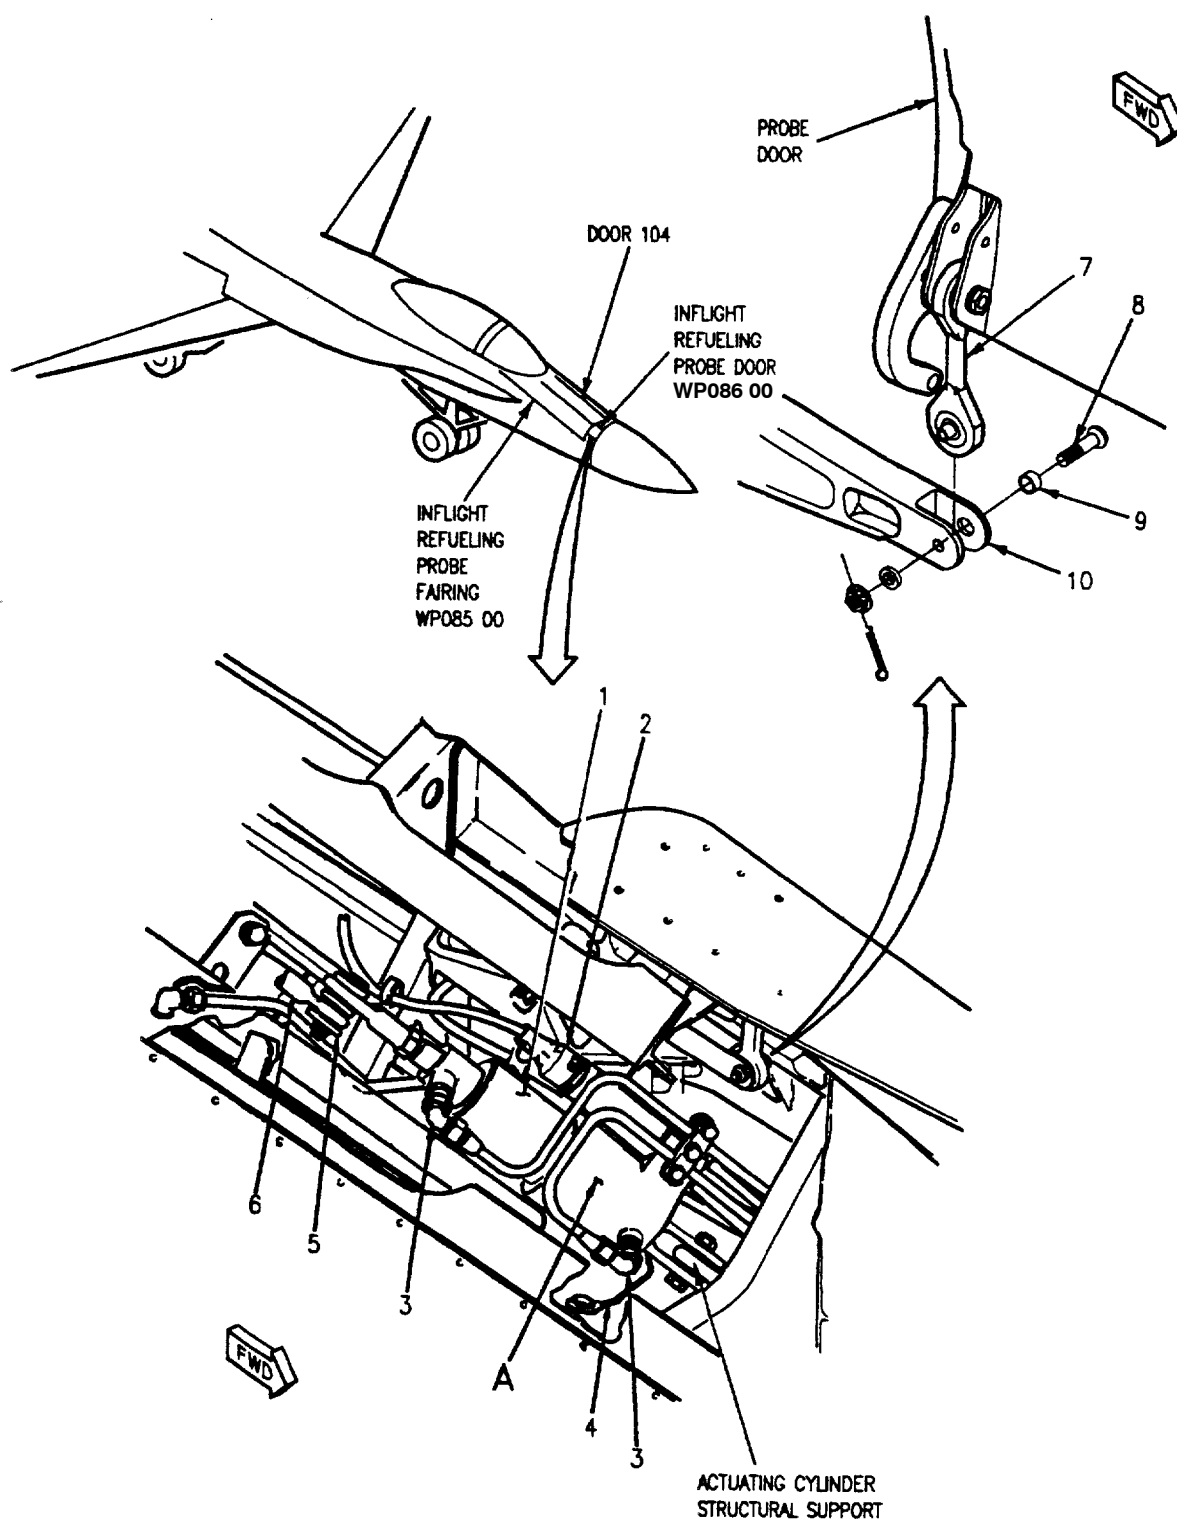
Inflight Refueling Probe Actuating Cylinder (5HPB006) (Sheet 2)
